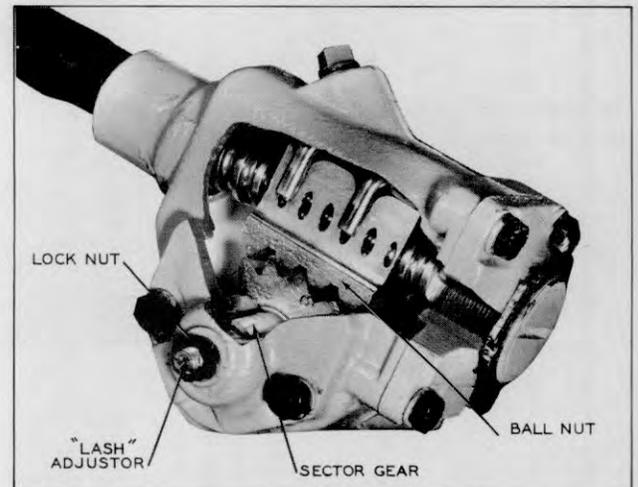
Steering Gear Lash Adjustment (Sector Gear)
